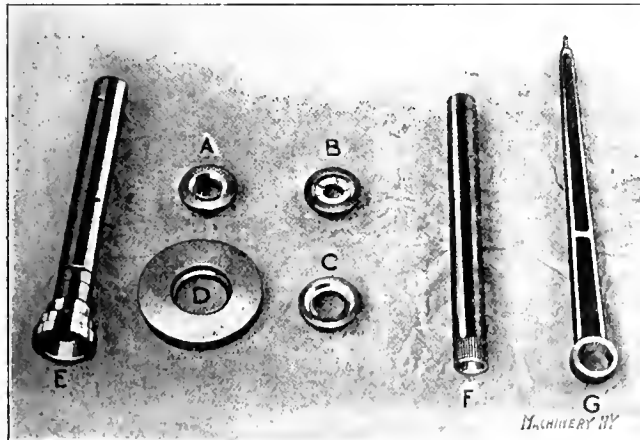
Tools for Corrugating Ends of Shafts, and Sample of Work
